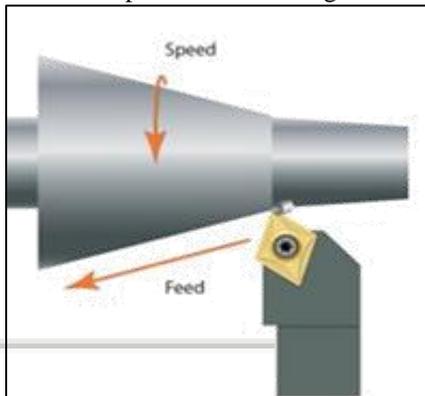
A taper is turned on a lathe by cutting at an angle relative to the workpiece centerline.
